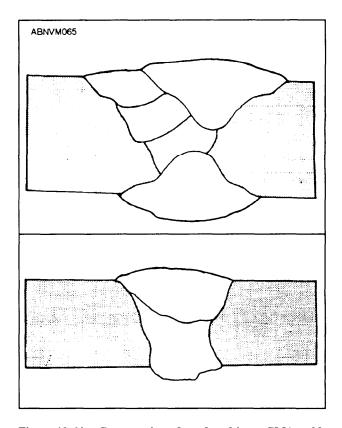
Cross section of good multipass GMA welds free from defects.
